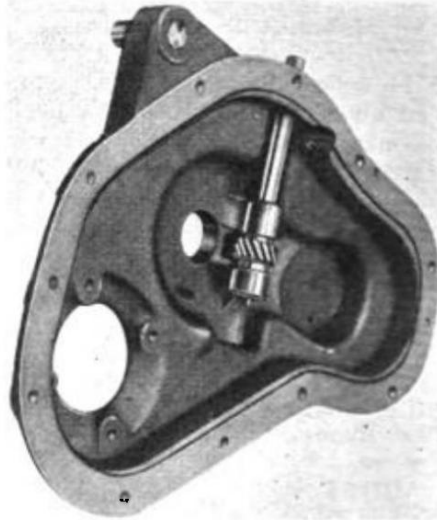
Showing the Interior of Timing Gear Cover and Ignition Drive Assembly
